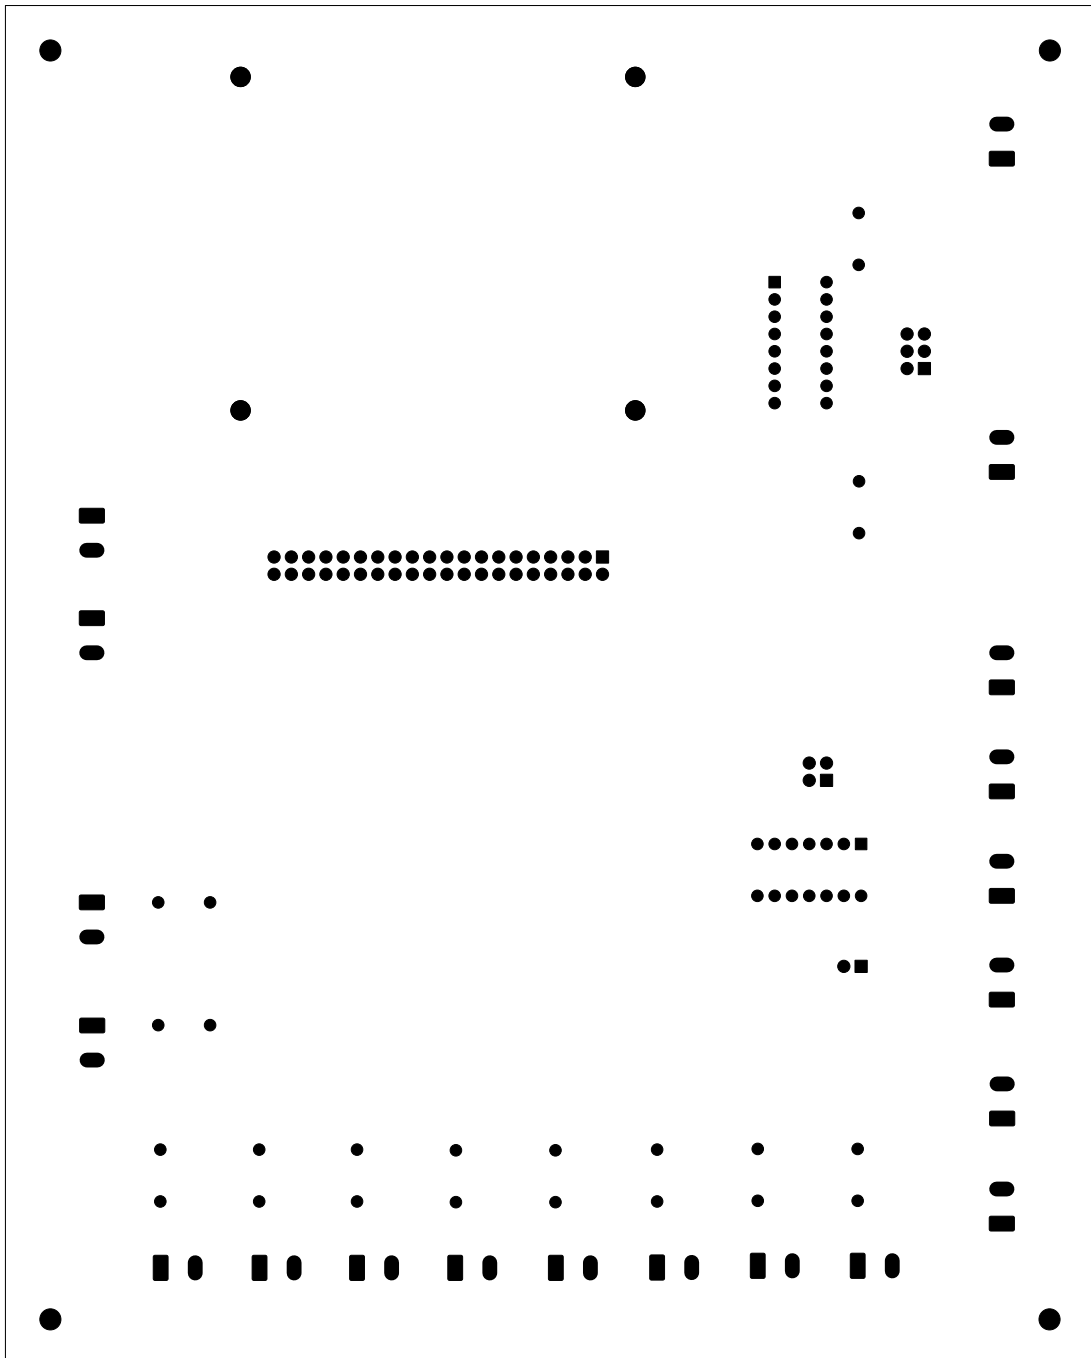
Front and Back mask file shows which parts of a board on the top and the bottom should not be covered by a non-conductive material
